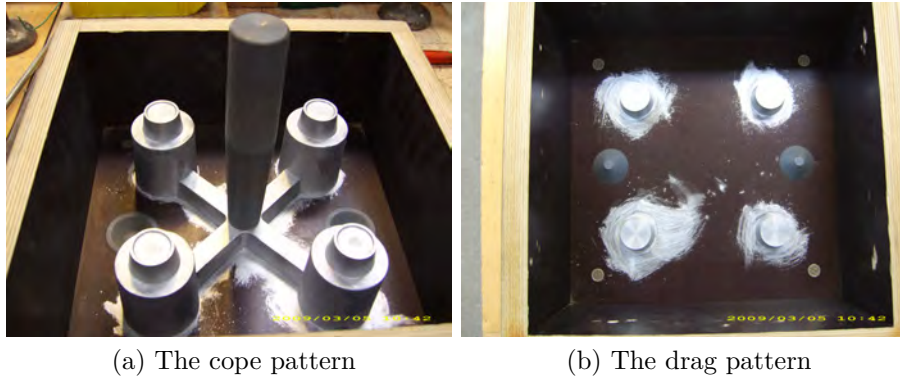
The mould pattern used for the horizontally-parted moulds.
